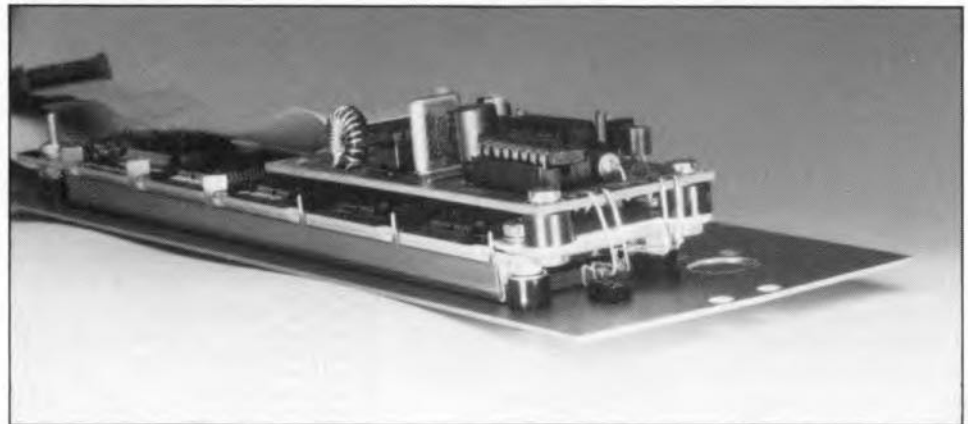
Suggested mounting of the infra-red receiver on a small piece of aluminium secured to the rear of the LCD unit. The LED and photodiode connections need to be extended in this case to enable the opto components to be fitted on the front panel.
